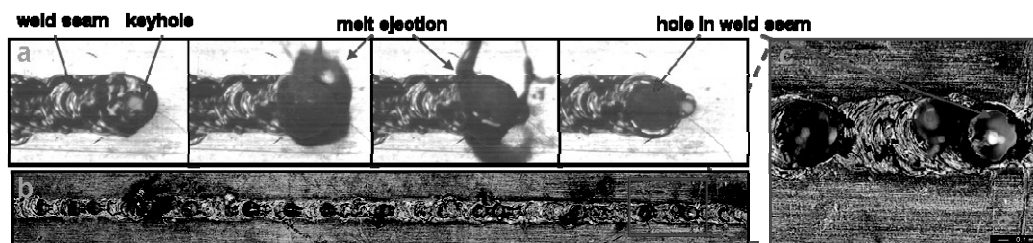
Welded copper sample, Cu-ETP,  $v = 6 \text{ m/min}$ ,  $P = 1500 \text{ W}$ . (a) Formation of a melt ejection out of high-speed-video; (b) Weld seam with melt ejections; (c) Enlarged image of a melt ejection.
